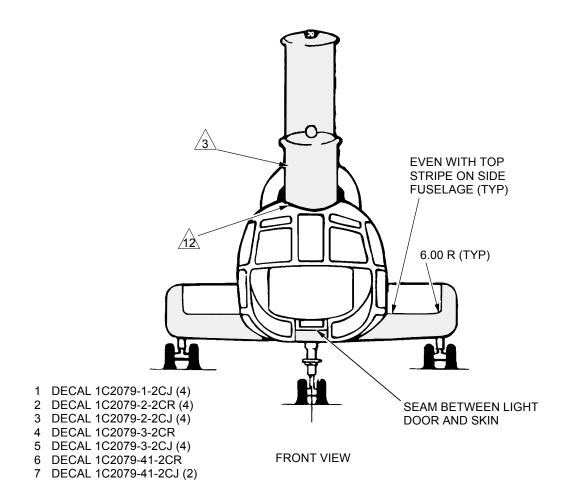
External Marking and Finishing, HH-46D (Sheet 3)
